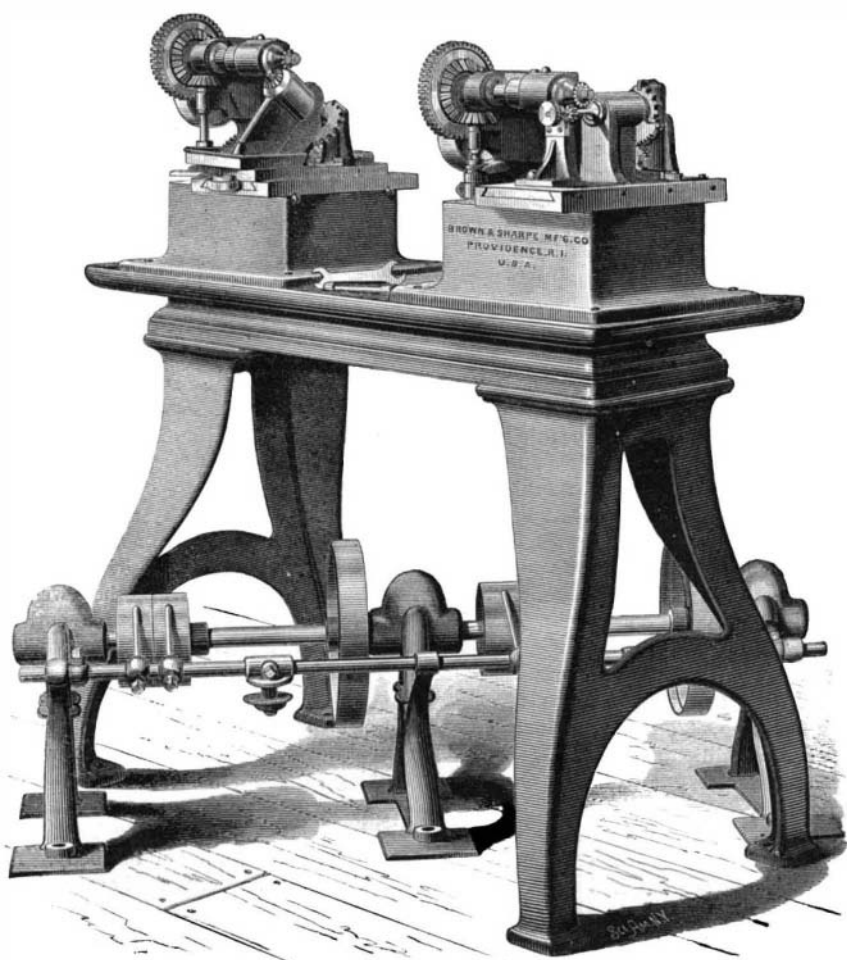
BEVEL AND SPUR GEAR CUTTING MACHINE.
